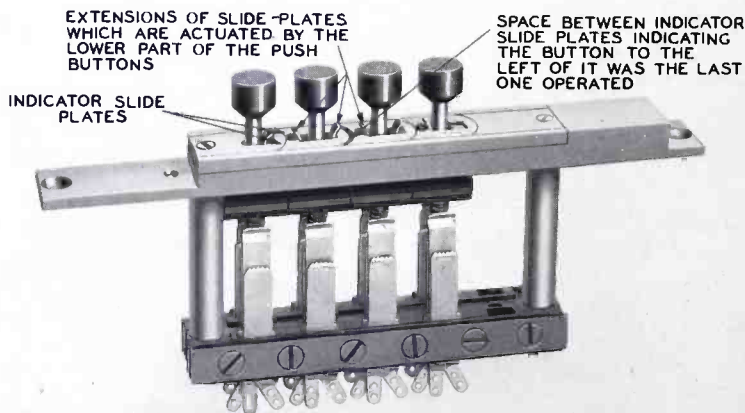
The push buttons of the old "manual ringing" key contained no locking mechanism, but embodied as an indicating mechanism the small sliding plates appearing on the top. The heavy line which appears to the right of the second button indicates that this was the last button operated
